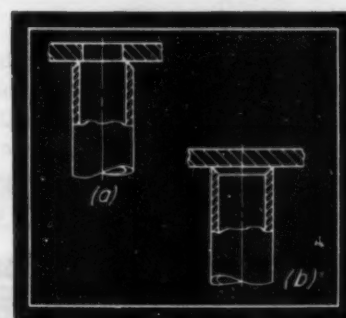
Right Above —Bevels are used in welding tubular sections to flats. The external bevel (a) results in minimum flash inside and (b) minimum flash outside
